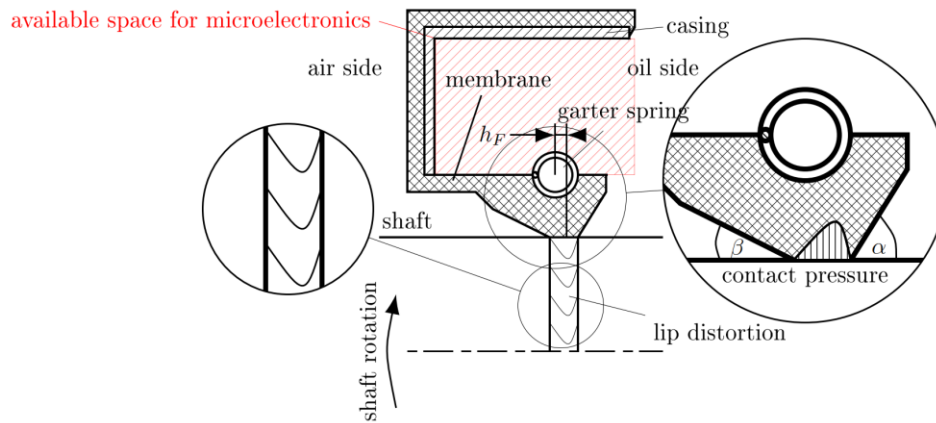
Cross section of a radial shaft seal and illustration of aspects of its sealing mechanism. Red: Available dead space that can be used to integrate microelectronics
